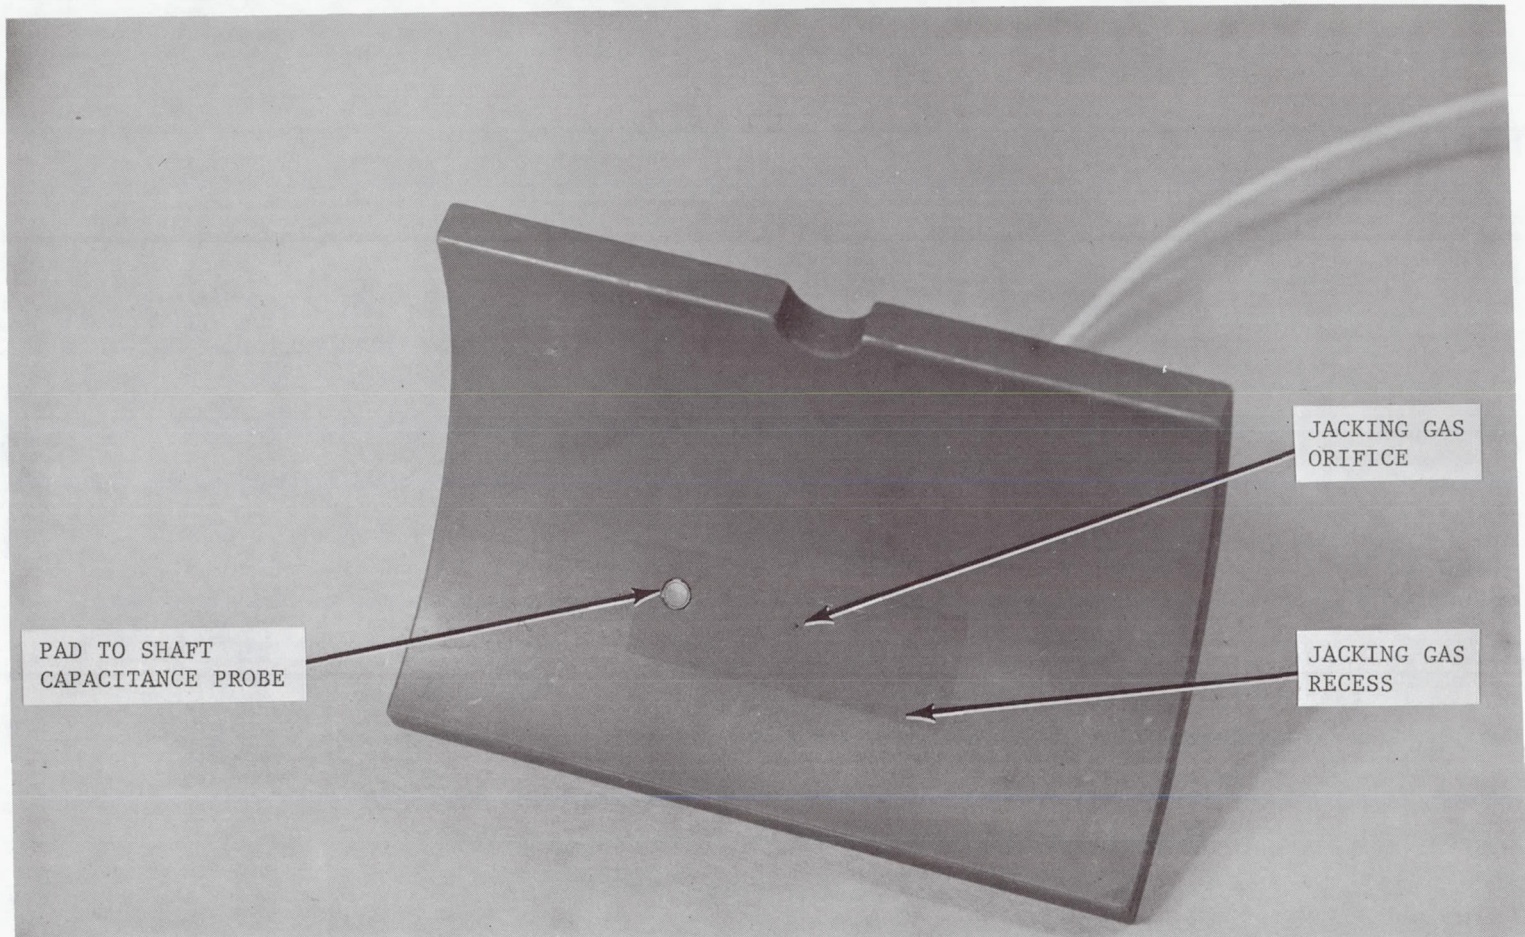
View of the Surface of a loaded Pad Showing the Pad to Shaft Capacitance Probe and the Jacking Gas Orifice and Recess
